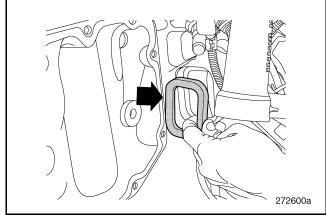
Coolant Pump Inlet Housing Formed Gasket
